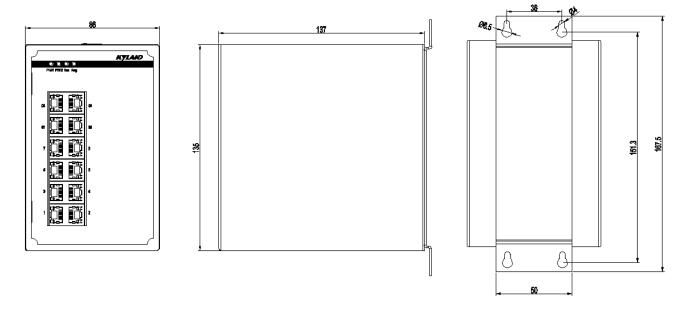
Dimensions for DIN-Rail Mounting (unit: mm)
